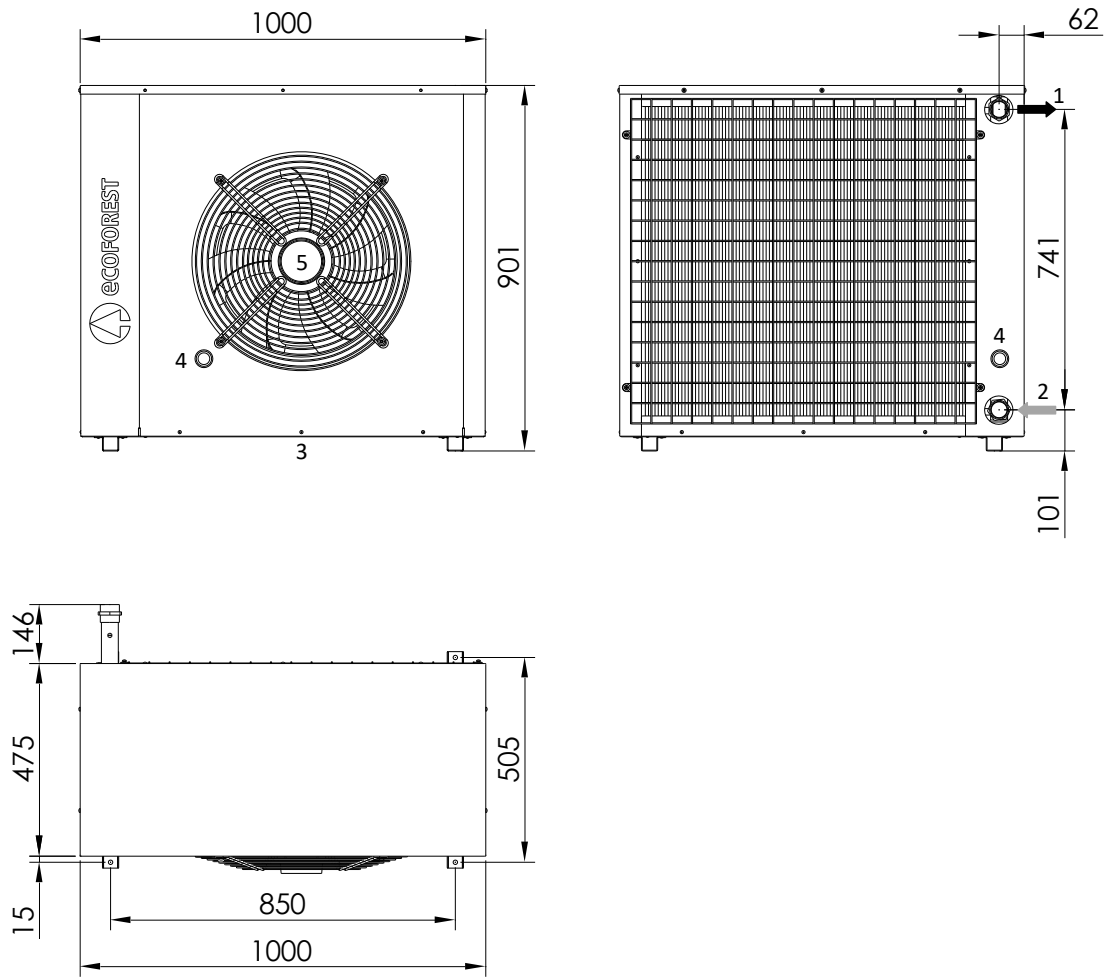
Overall dimensions and hydraulic connections (Amounts in mm).
